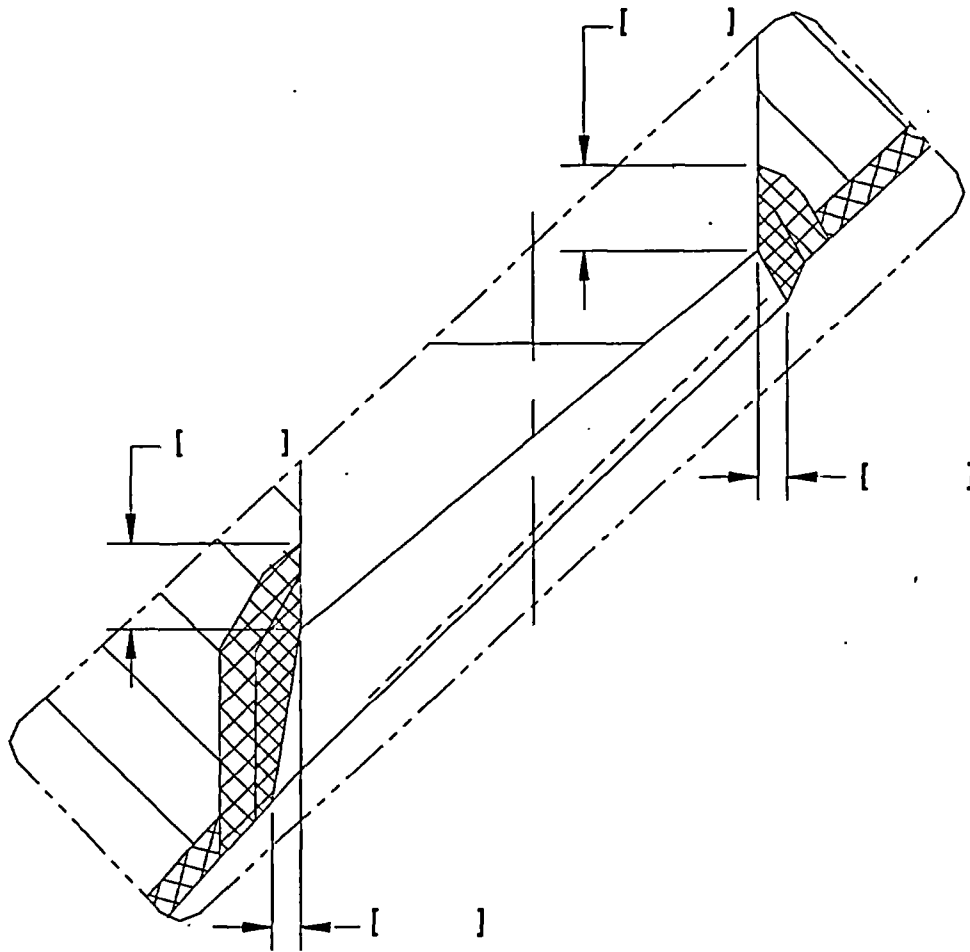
Remaining Portion of Original J-Groove Weld
